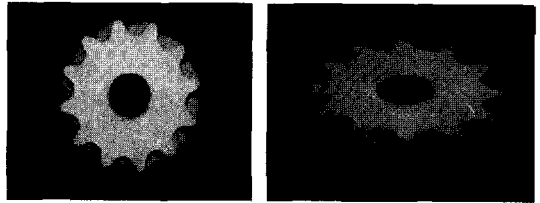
A helical gear fabricated by PaperMill(left) and its post-processed part(right).
